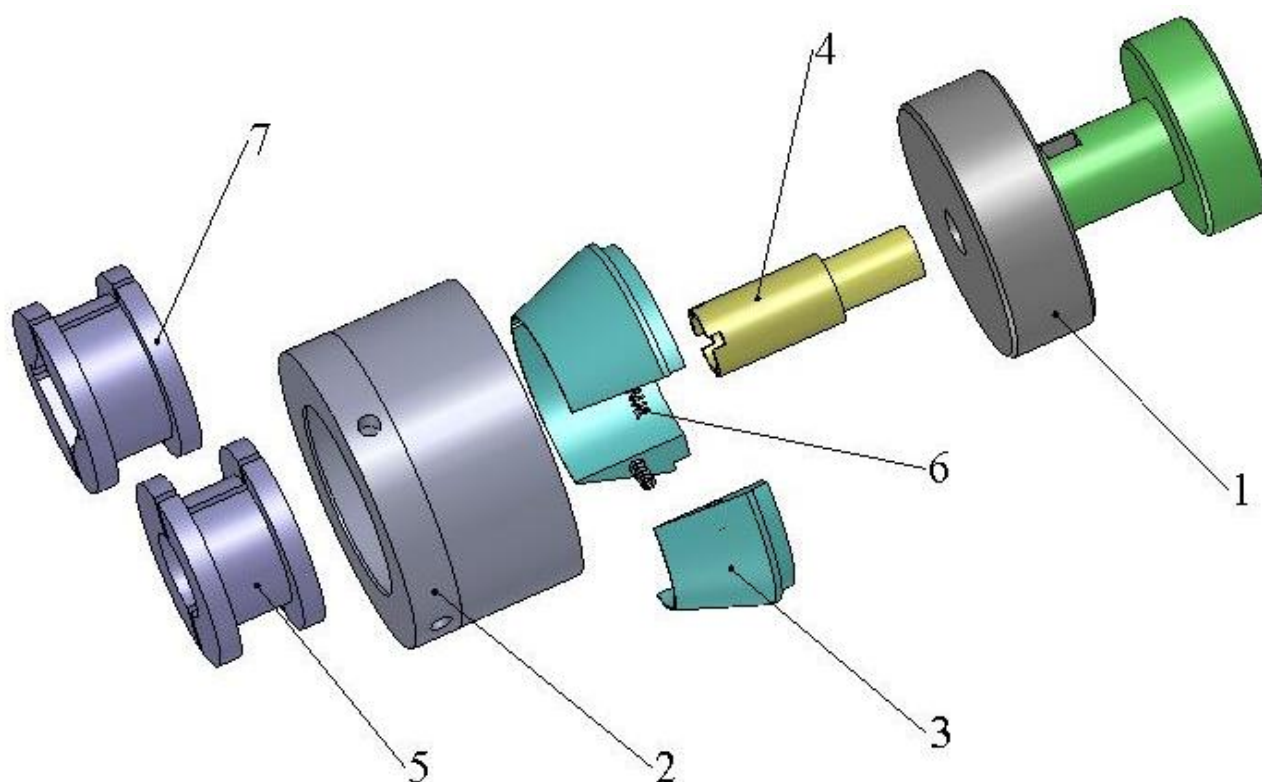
Components of the gripping device; 1 – body, 2 – gripping nut, 3 – jaw, 4 – spigot, 5 – modular element for gripping of circular pipe samples, 6 – spring, 7 – modular element for gripping of rectangular pipe samples.
